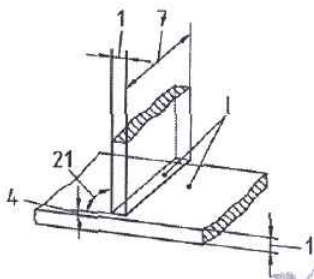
Preparation for fillet weld (T-joint)
